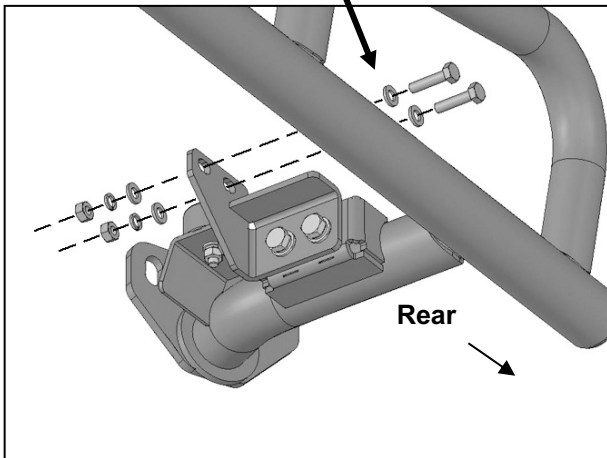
Reinstall Rocker Slider. Attach Support Bracket to outside of pinch weld
